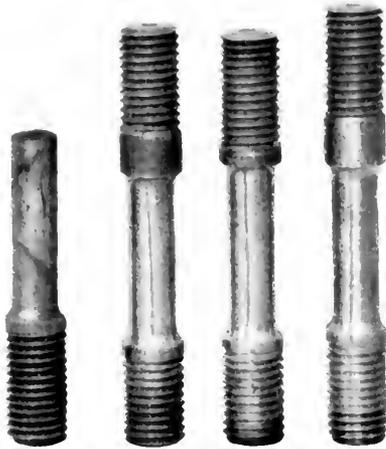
Four Welded Specimens, which broke in the threads on the first two tests, turned to one-half inch diameter for the third test
